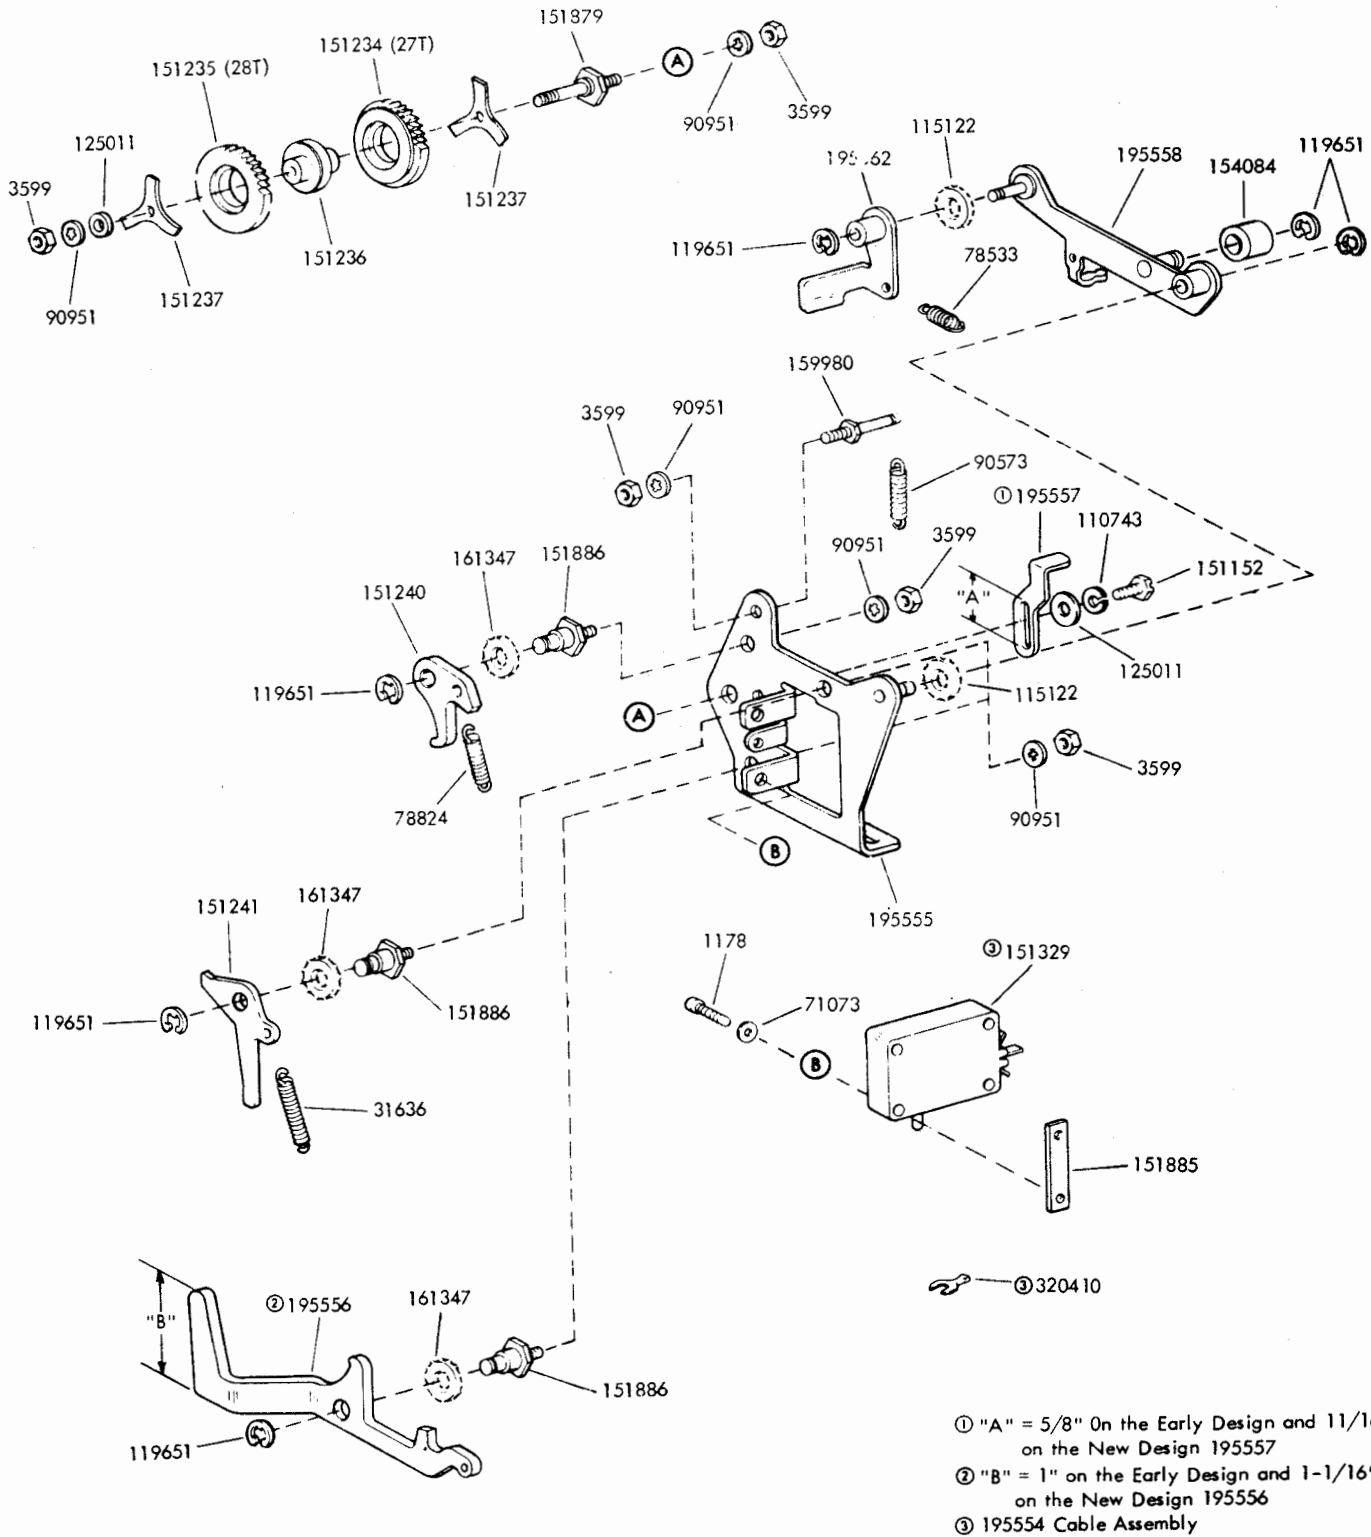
19553 Time Delay Motor Stop Assembly - Used on High-Level Sets
